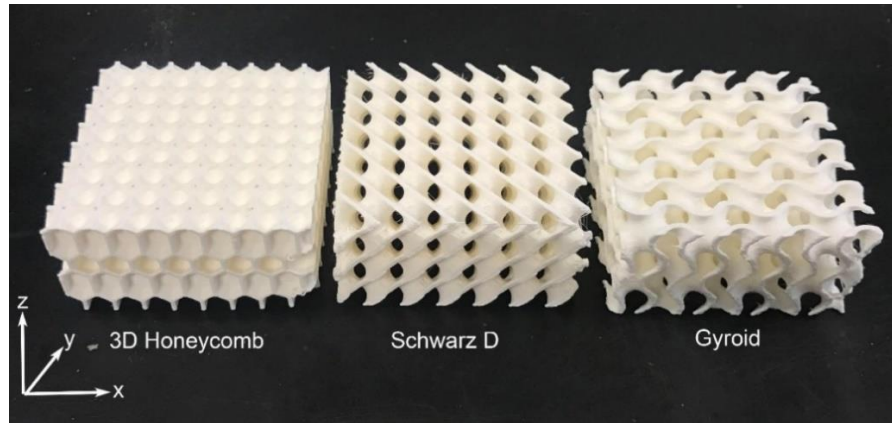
Compression test specimens produced by Craftbox XL 3D printer.
